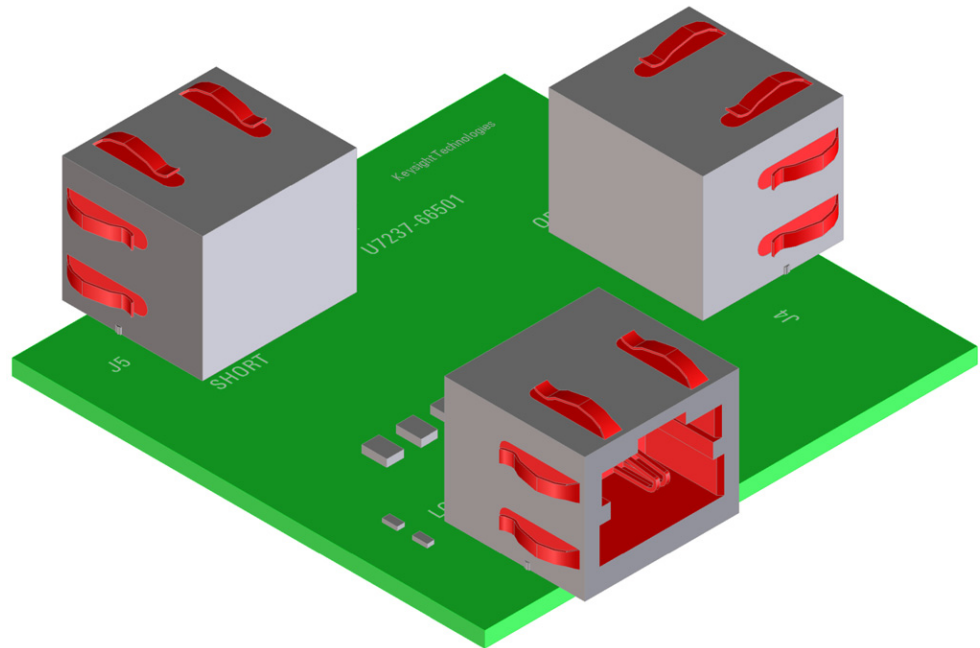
Section 3 of the U7237A 10GBASE-T Transmitter Test Fixture
